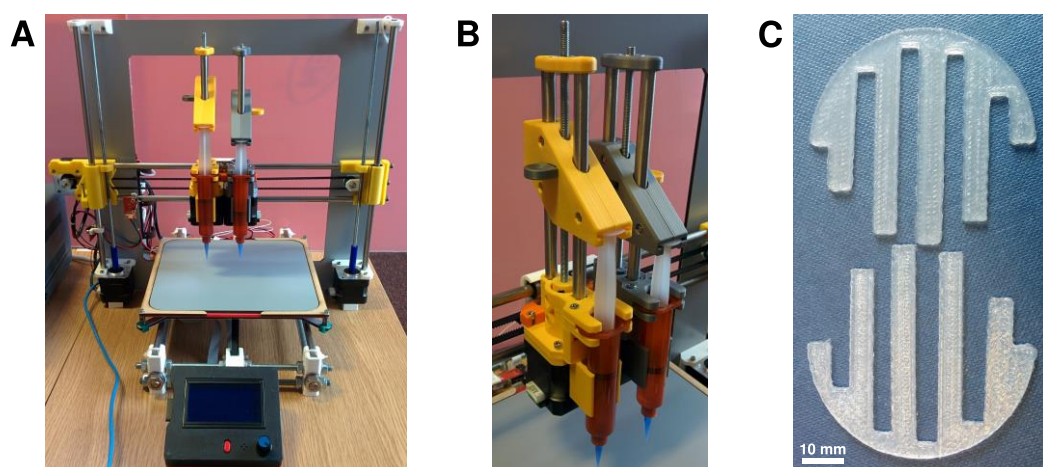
First-generation 3D printer with two syringe pump extruders. A) The 3D printer based on a Prusa i3 kit with modified print head. B) Close-up view of the print head with two syringe pump extruders. C) Single-material test pieces printed with silicone sealant. The geometry was designed to test specific feature sizes and does not serve any practical function.
